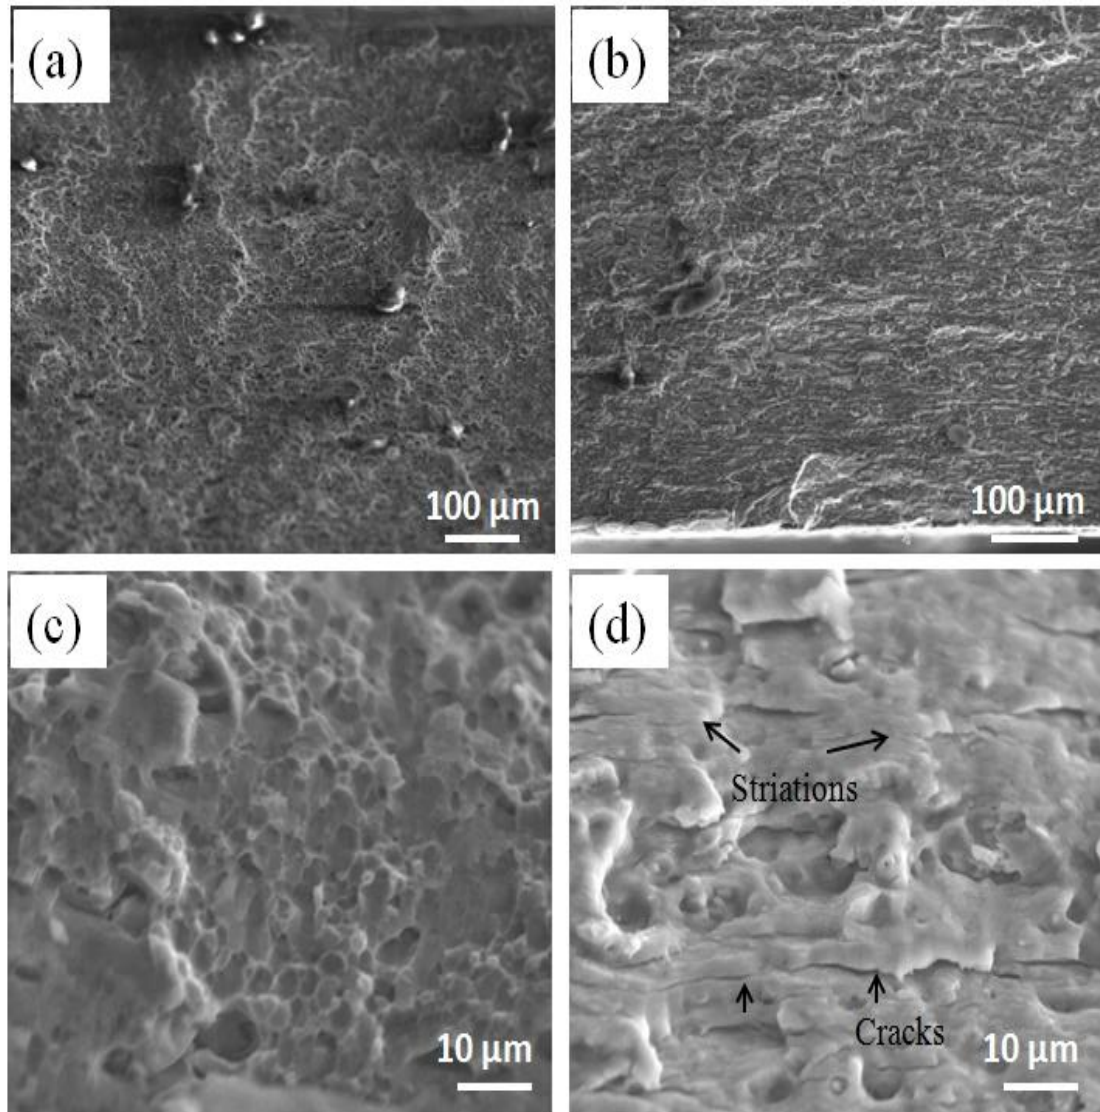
Fractured surfaces of 5083 Al alloy after subjecting to fatigue testing of cryorolled sample (CR 85%).
